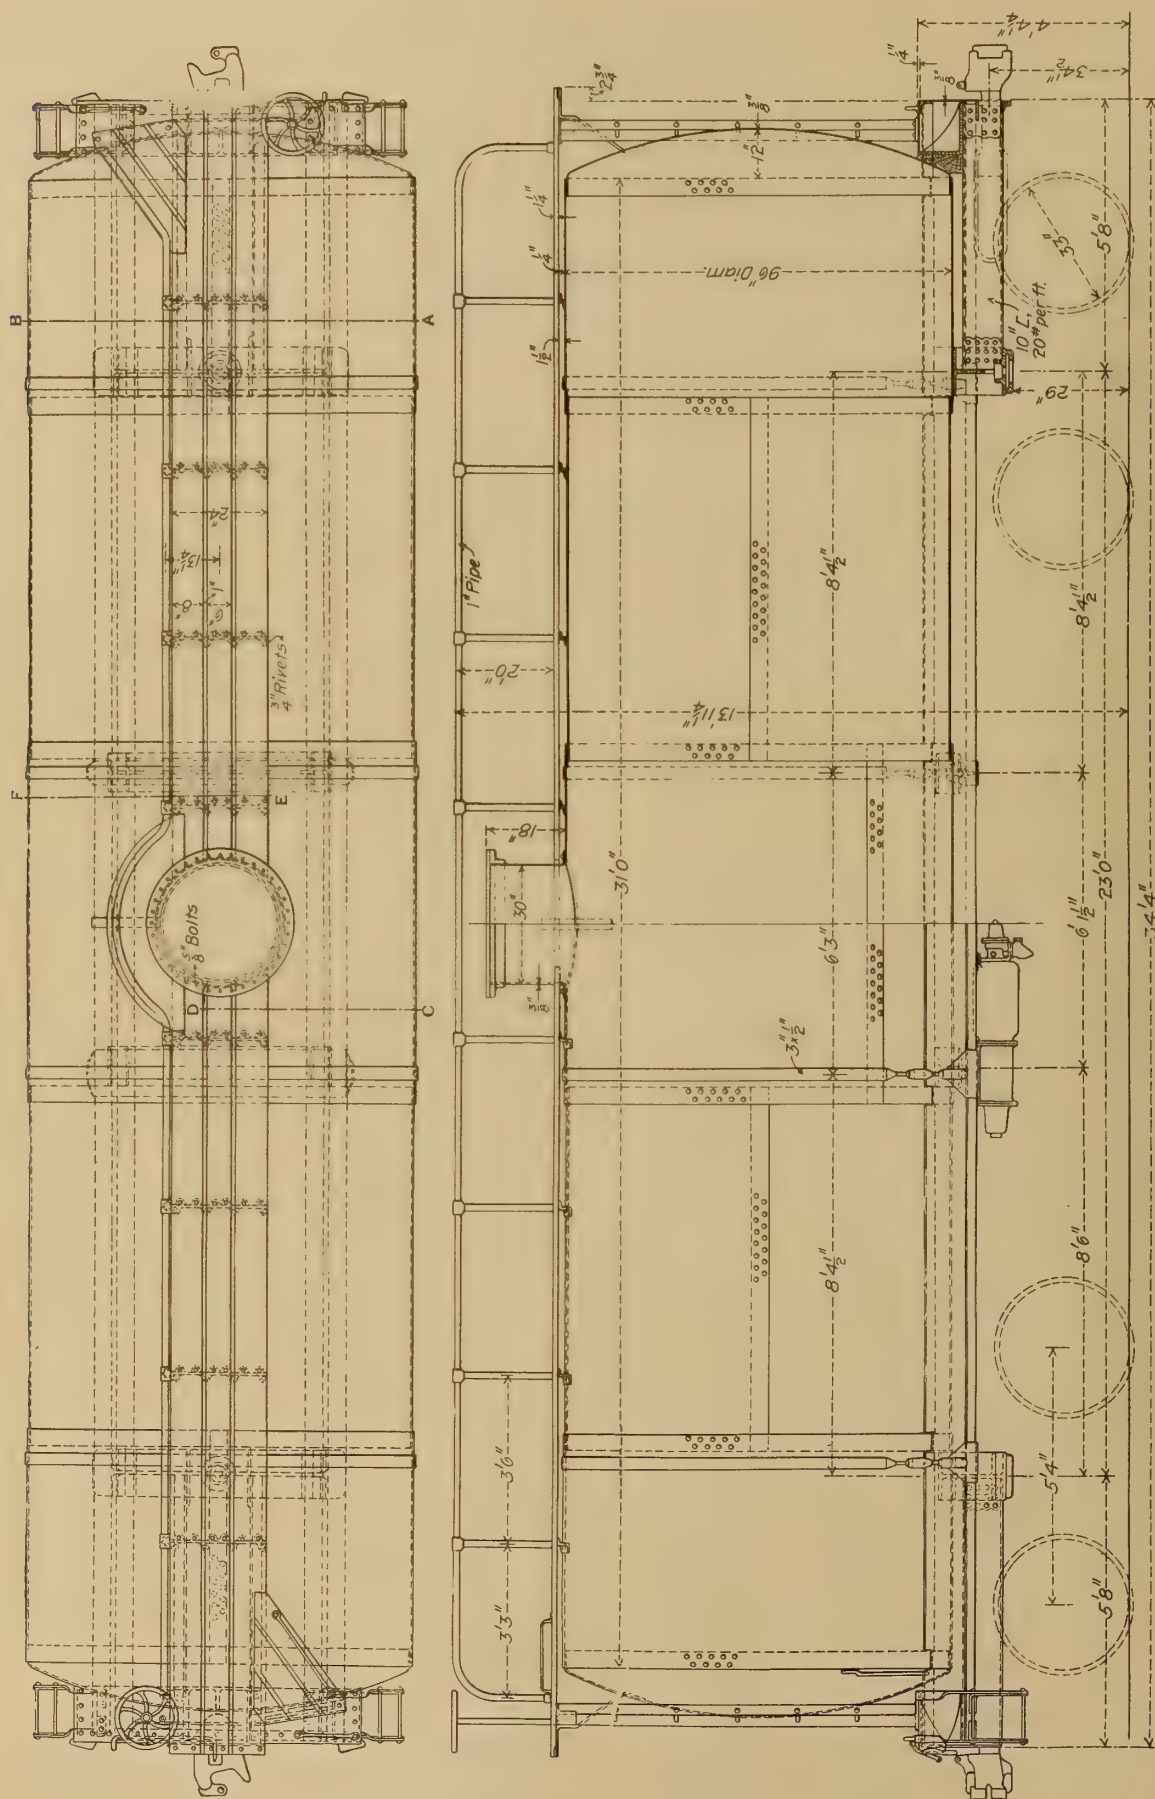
PLAN, ELEVATIONS AND SECTIONS OF 38 FT. TANK CAR. U. T. L. BETTENDORF STEEL UNDERFRAME. CAPACITY, 12,000 GALLONS, OR 100,000 LBS. WEIGHT, 44,000 LBS.
